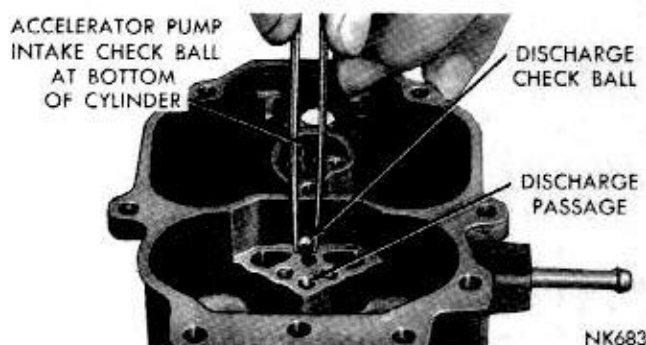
Installing Accelerator Pump Discharge Check Ball
